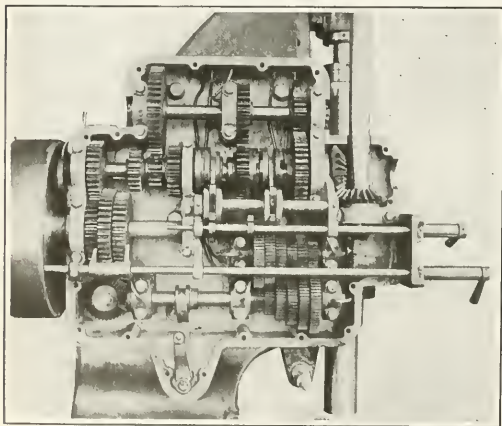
Arrangement of Gearing in Speed and Feed Box
